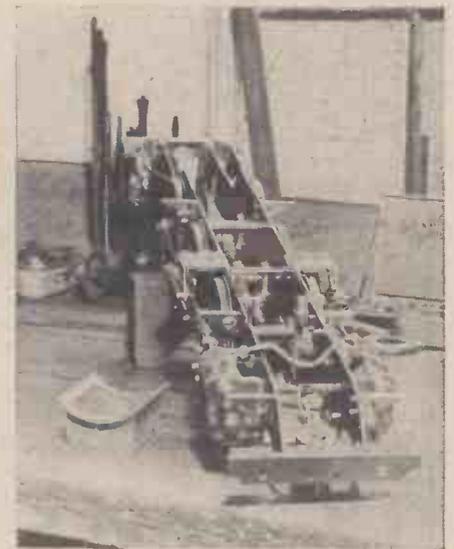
This view of the engine chassis shows the steam and exhaust pipe connections, feed pump, and footplate brackets
